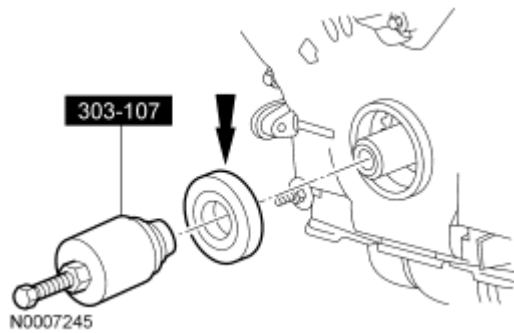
Removing Crankshaft Front Seal Using Special Tool (303-107)
